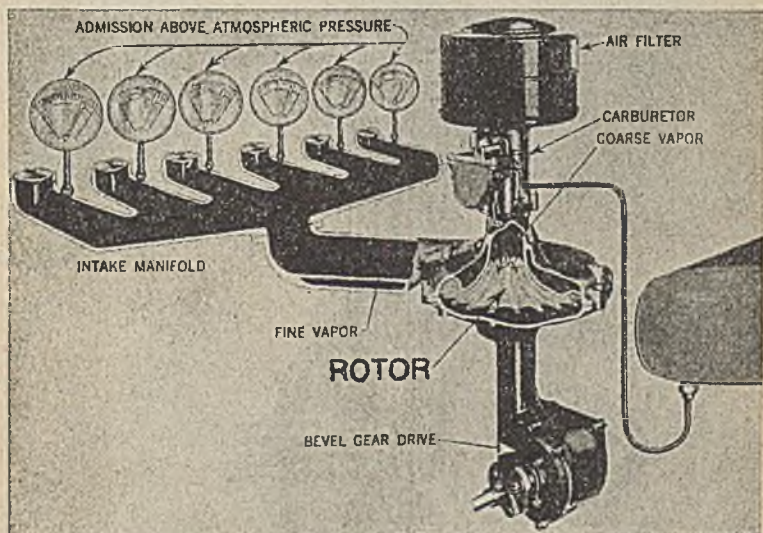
Graham super-charger showing details and connection to inlet manifold.
